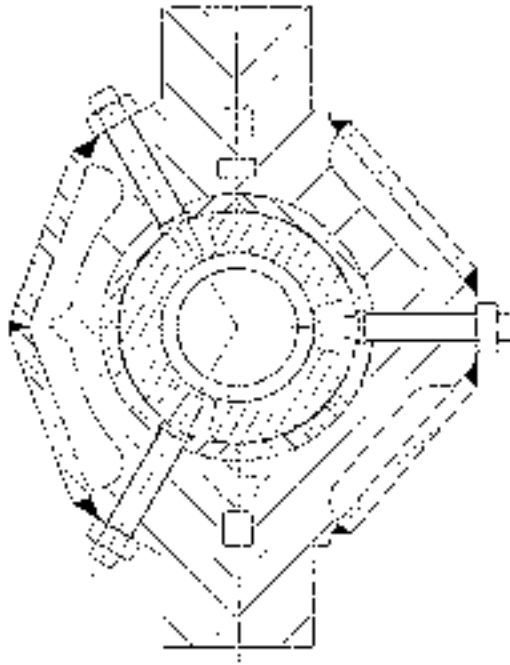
Reciprocating single screw extruder (Buss, Ko-kneader)
